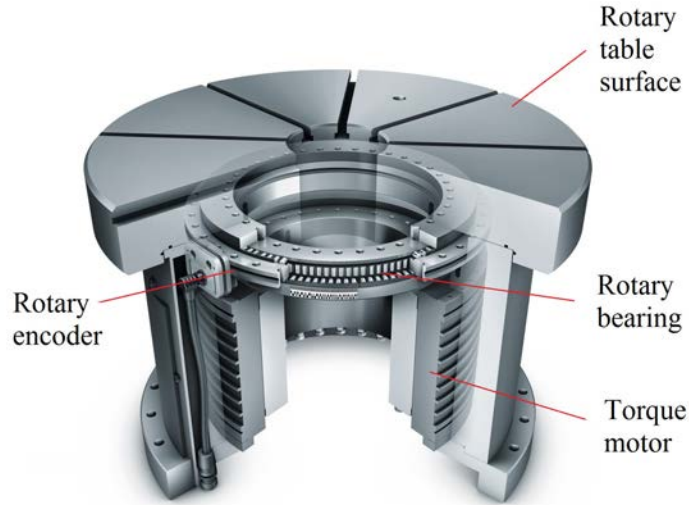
Structure of a torque motor driven rotary axis [52].
